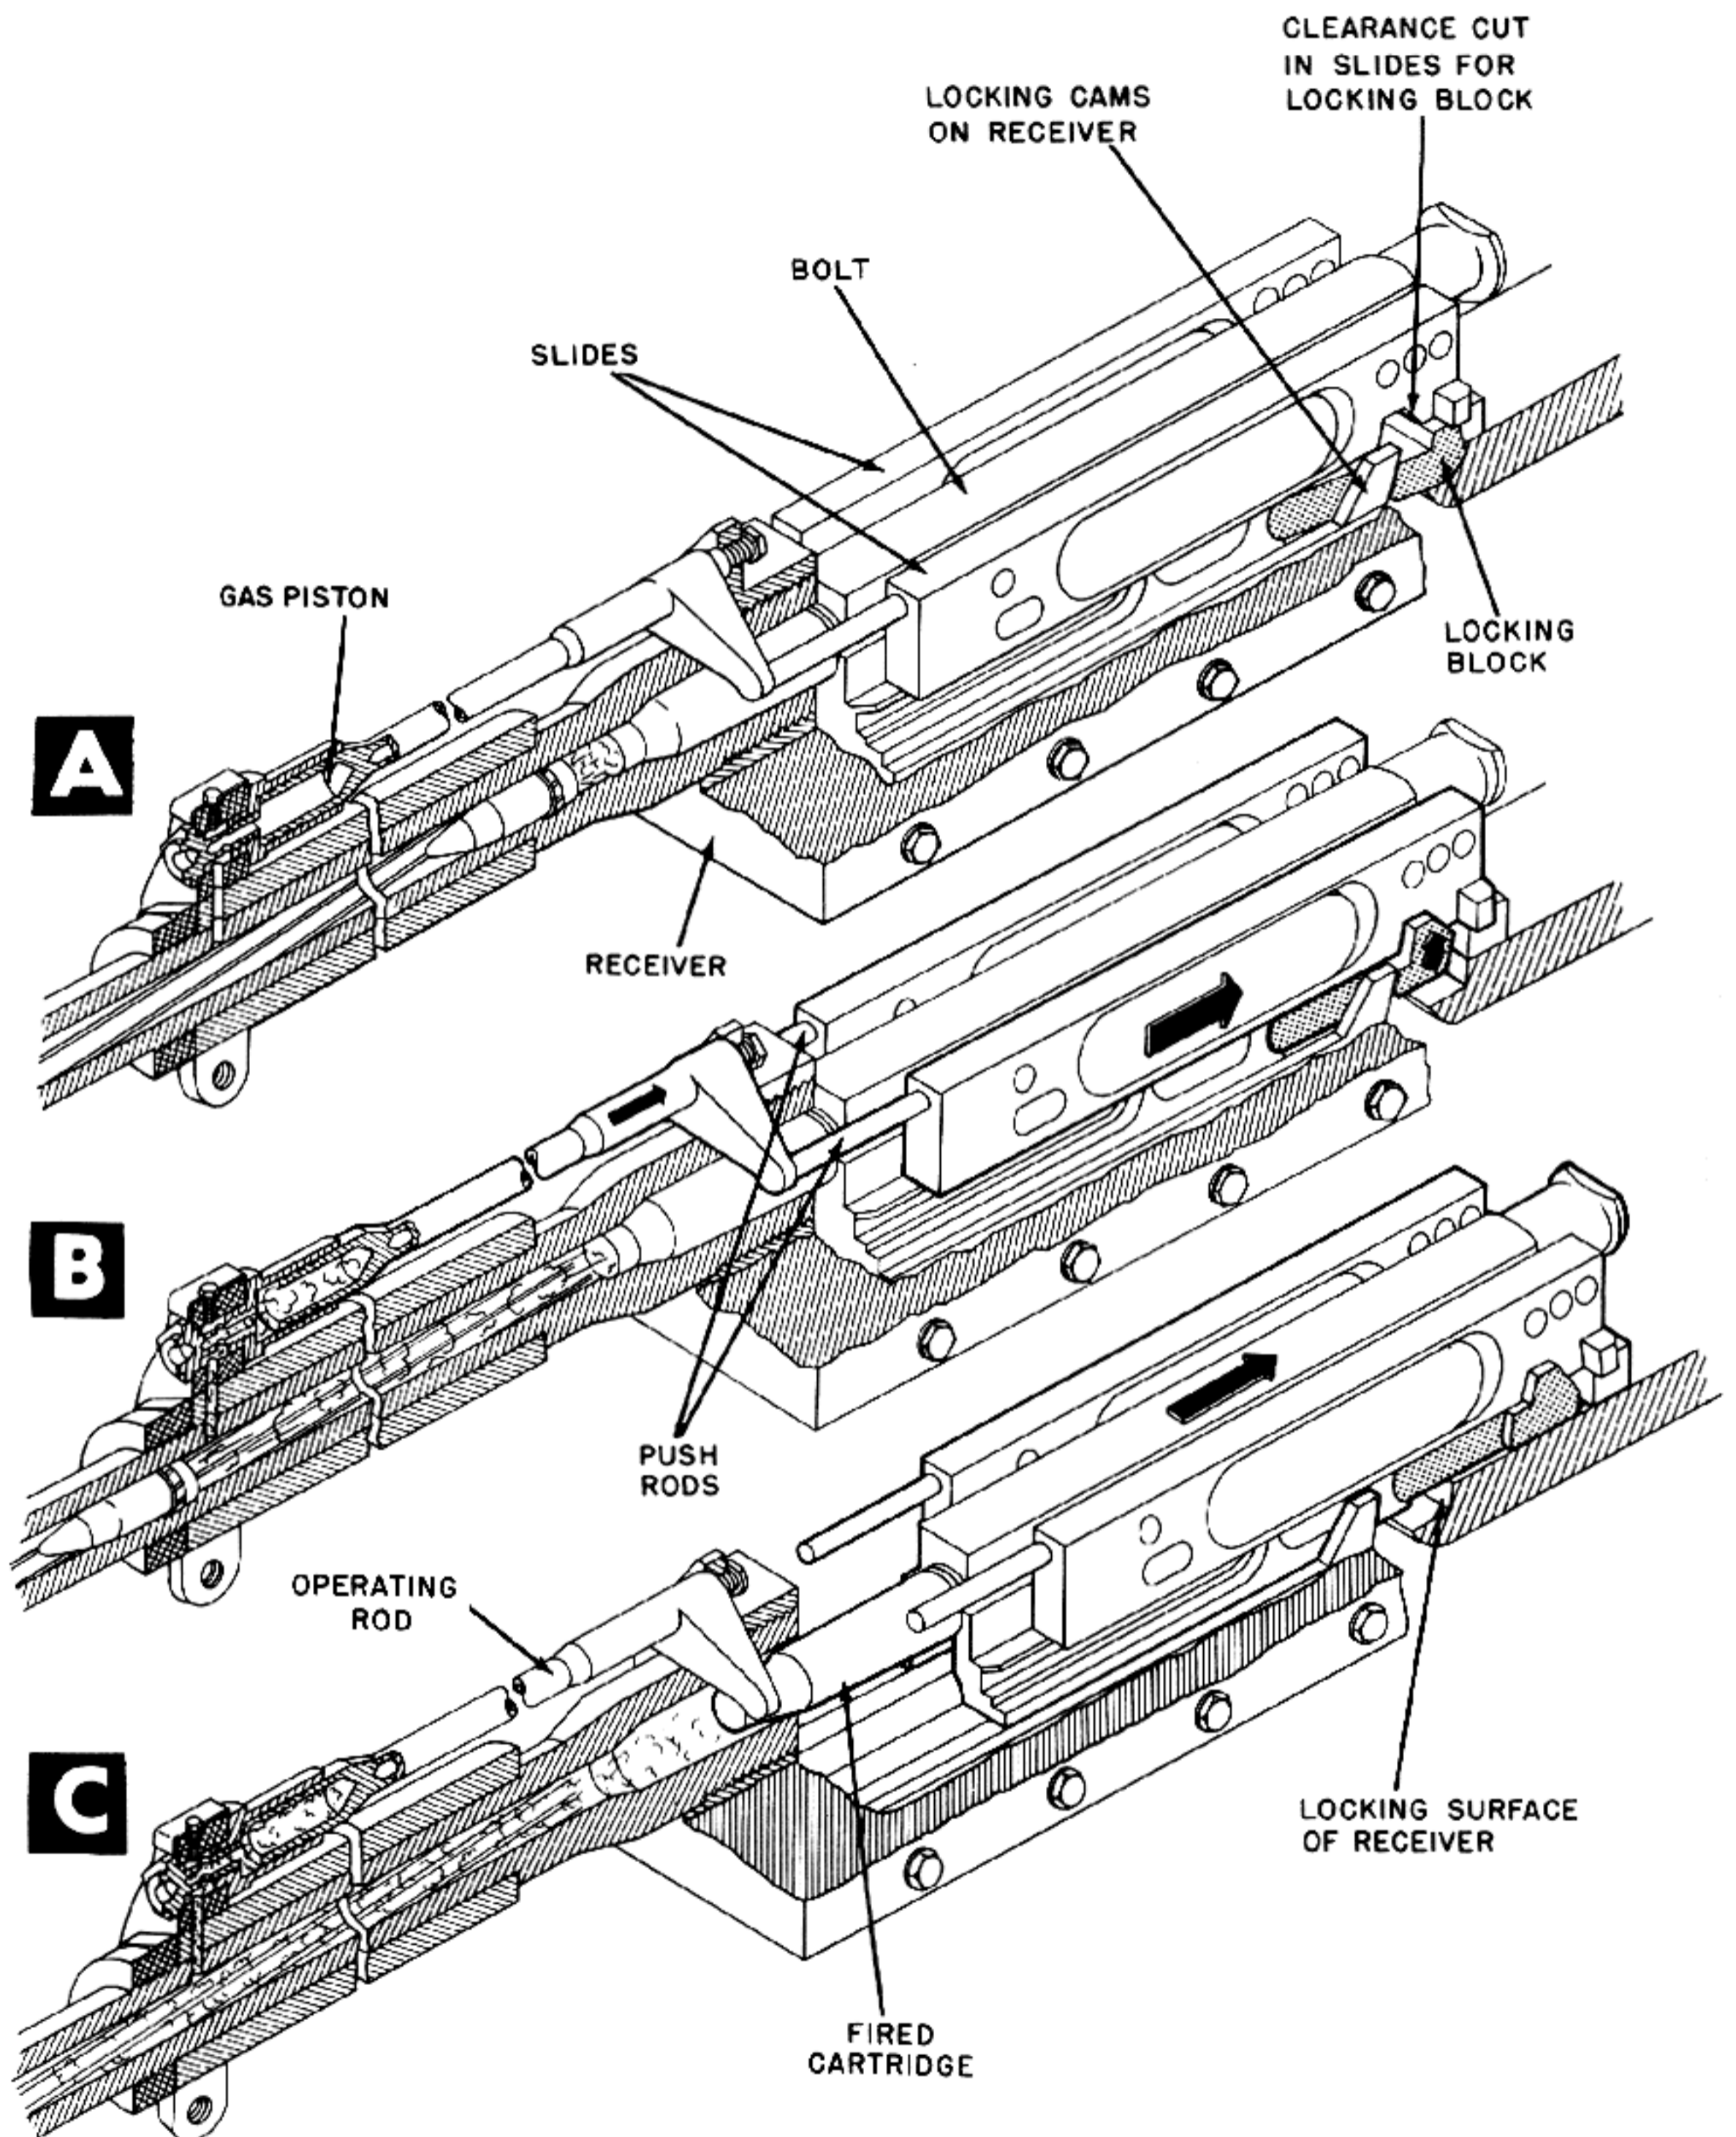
Slides Recoil Far Enough To Permit Locking Block To Cam Free of Receiver.
